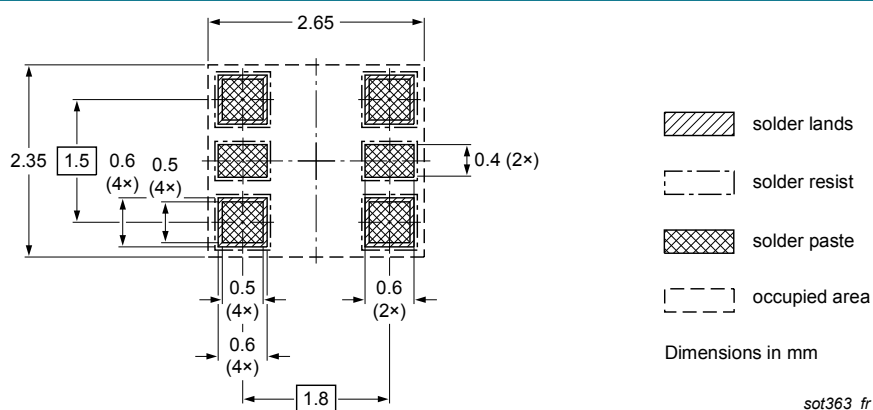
Reflow soldering footprint for TSSOP6 (SOT363)
